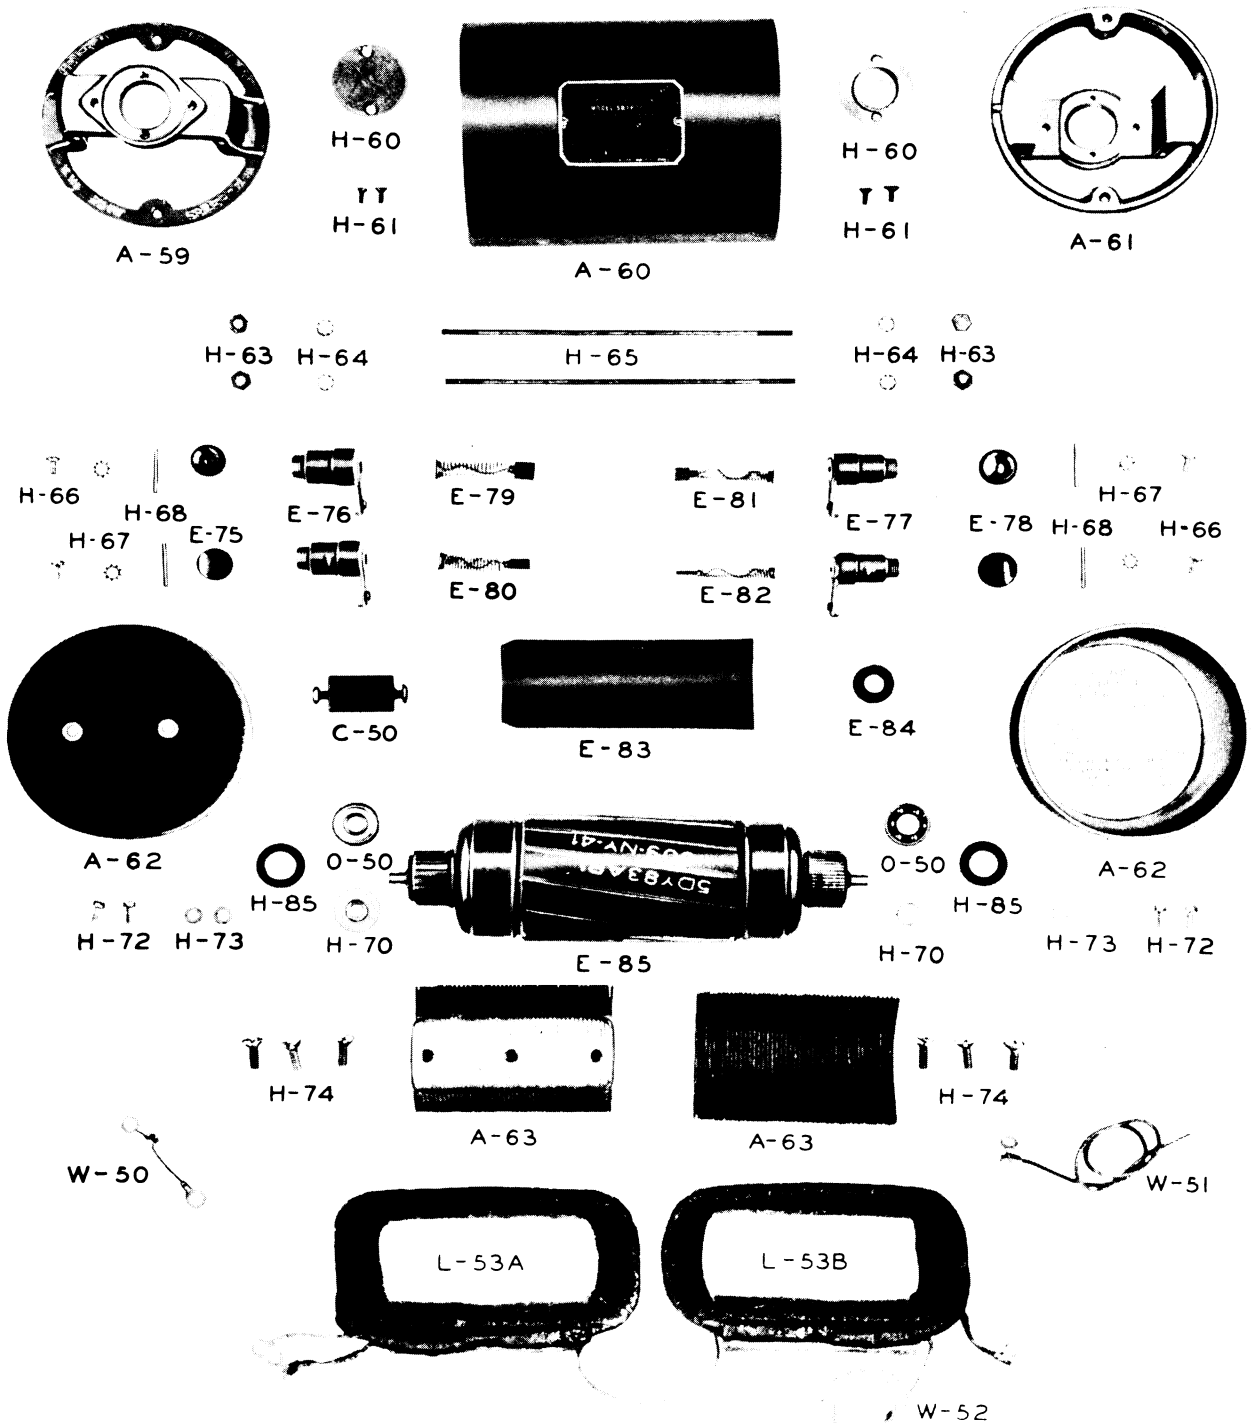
A — PHOTOGRAPH OF PARTS AND DYNAMOTOR MACHINE USED IN DYNAMOTOR DM-33-A
